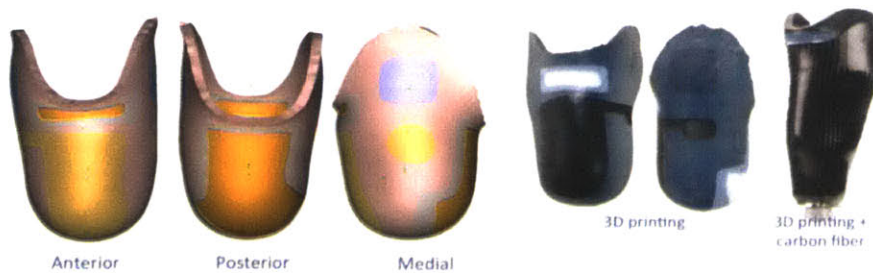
STL showing different materials, 3D printed part and 3D printed parts with carbon fiber
